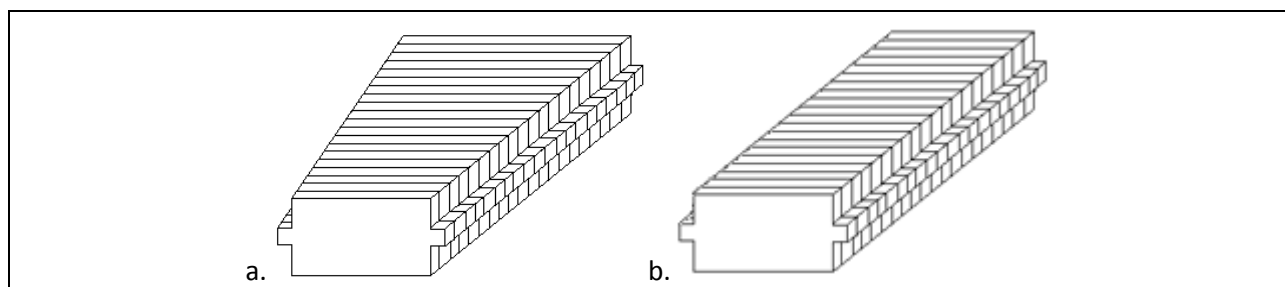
Rotor Tooth Construction - Tapered vs. Parallel Side
